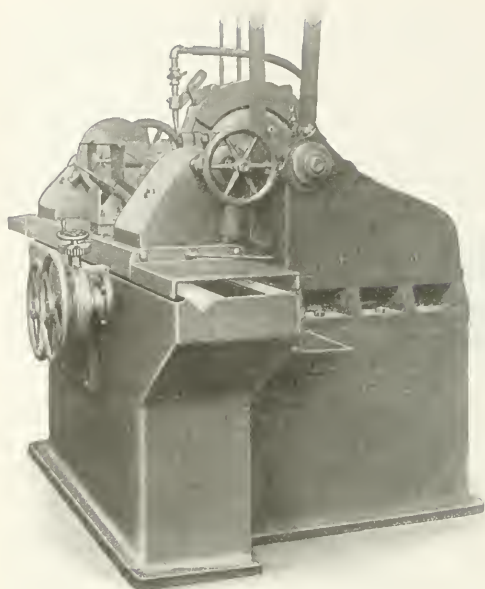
End View of "Sterling" Grinder built by Young, Corley & Dolan, Inc.
